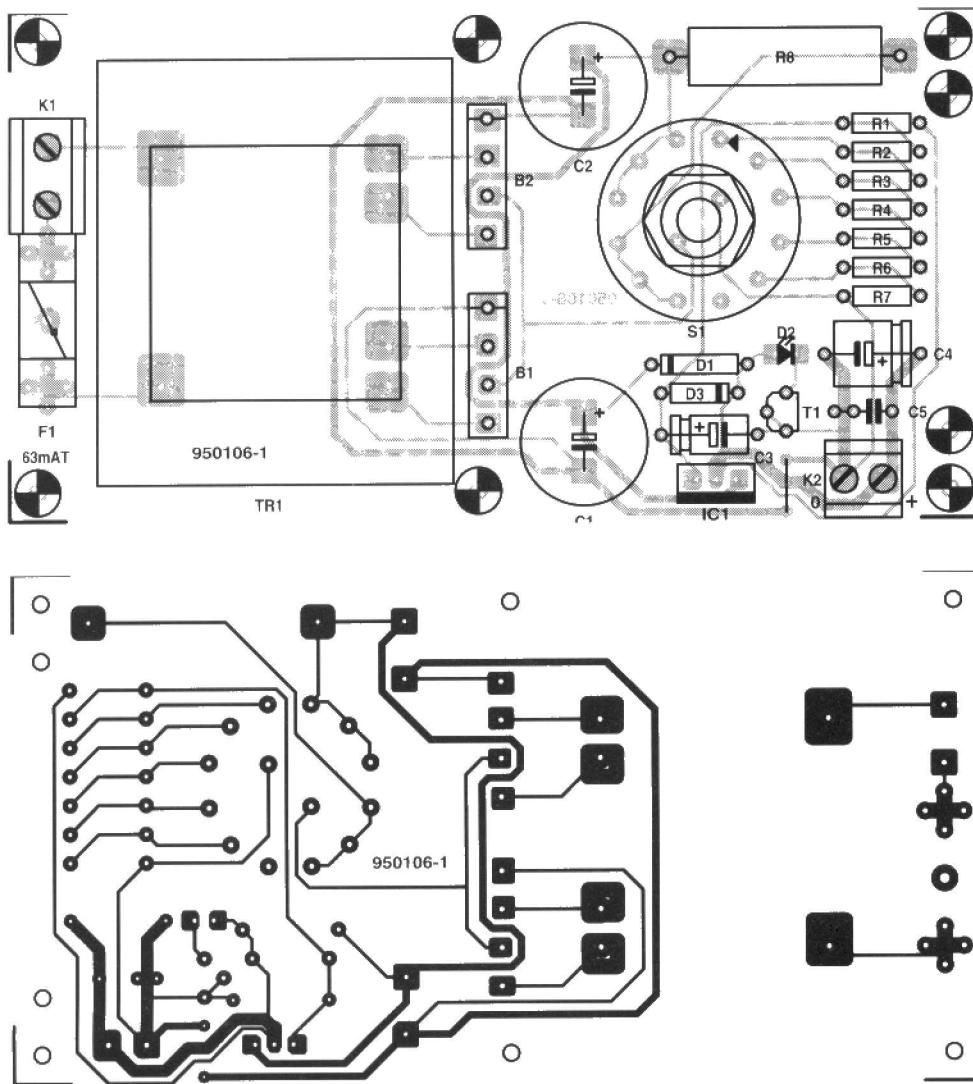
The PCB has been kept compact. The regulator is fitted at the track side.
